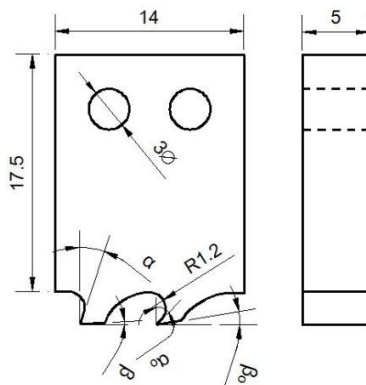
Broaching tool's drawing (α : Rake angle of the first tooth, β : Clearance angle of the first tooth, α_0 : Rake angle of the second tooth, β_0 : Clearance angle of the second tooth, R: radius of the internal curvature of the gullet)
